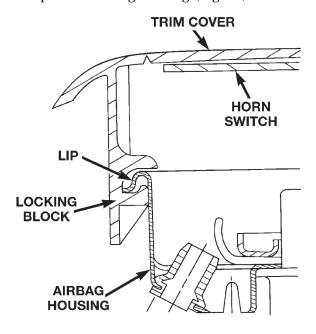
Driver Side Airbag Trim Cover Remove/ Install - w/Speed Control
